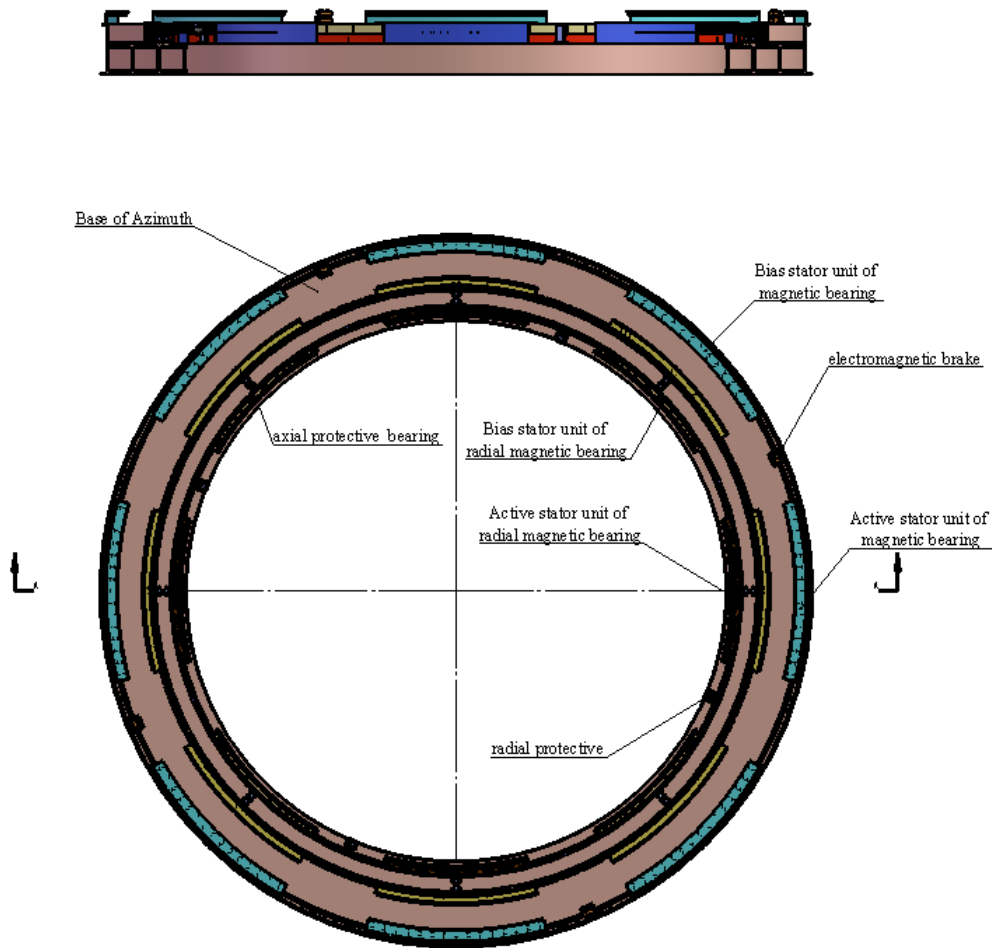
Azimuth drives and bearings systems based on active bias magnetic suspension bearing integrated with direct drive motor
